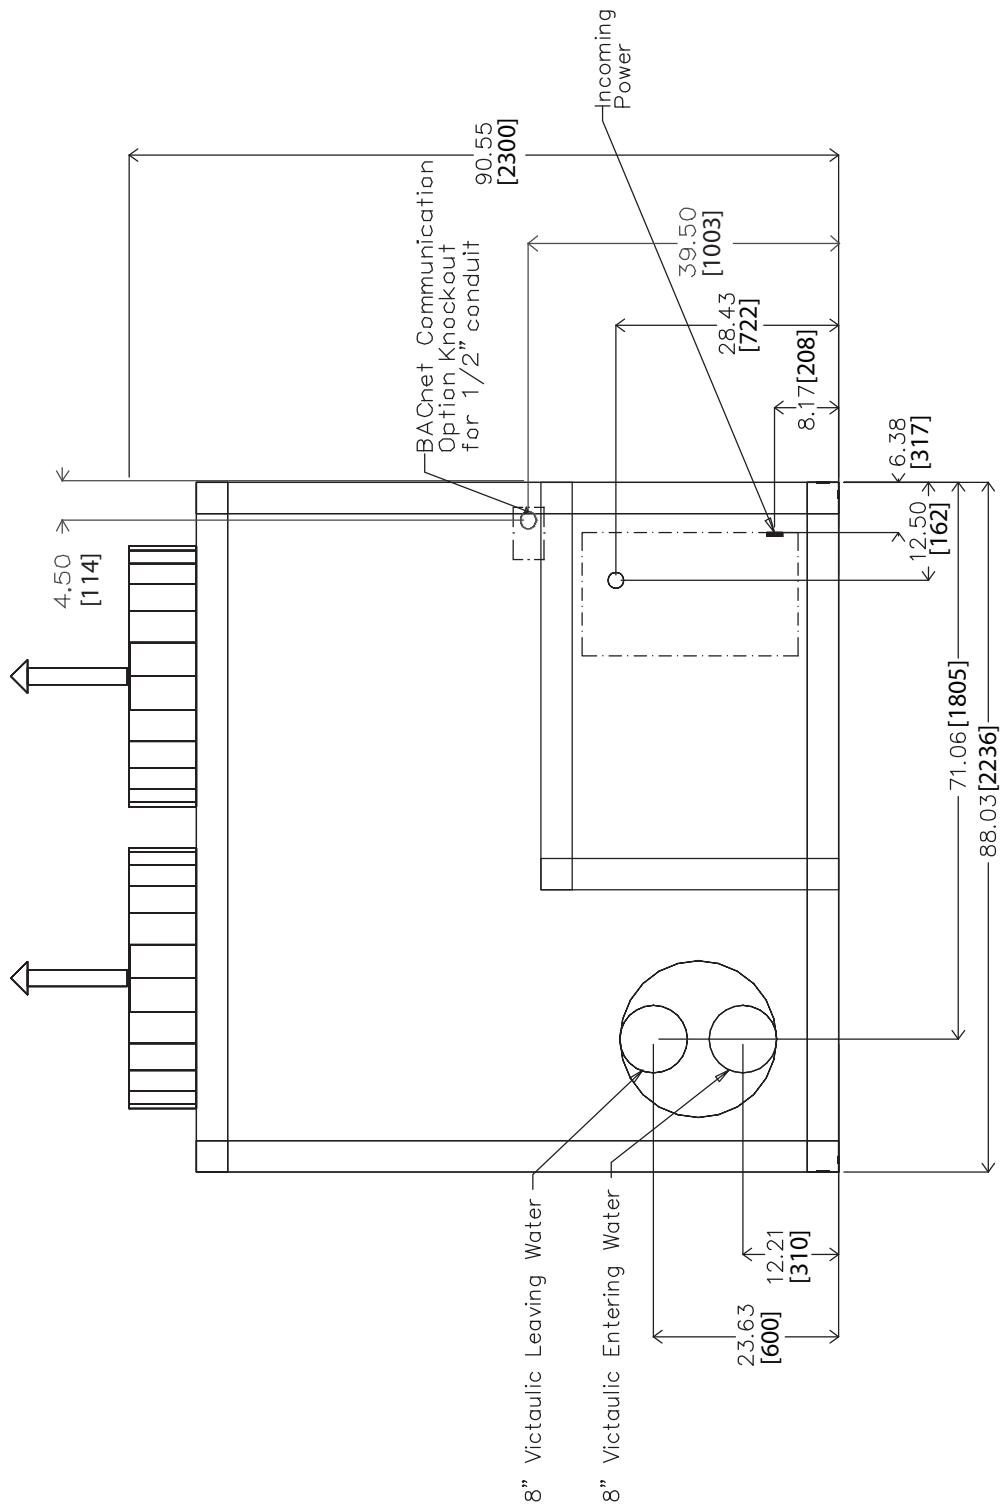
30XA260, 280, 300 Air-Cooled Liquid Chiller Dimensions (cont)
